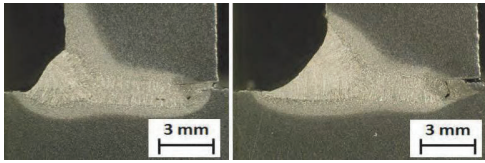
Focal point position: left +2 mm, right -2 mm. AH36 8 mm, welding speed 1 m/min, filler wire feed rate 5.2 m/min, laser power 4.56 kW. Arc power: left 3.15 kW, right 2.34 kW.
